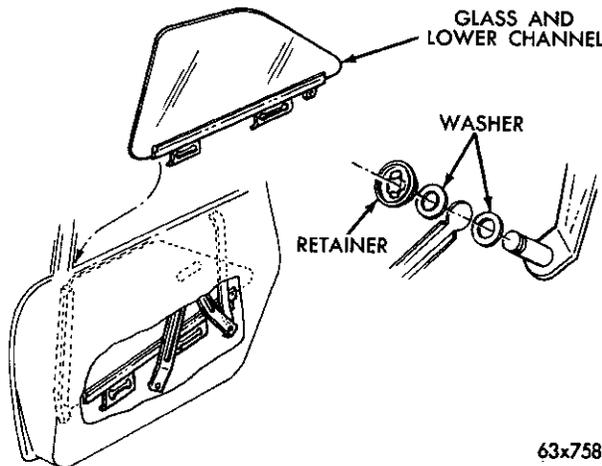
Rear Door Glass Assembly (Chrysler Four Door Sedan)
